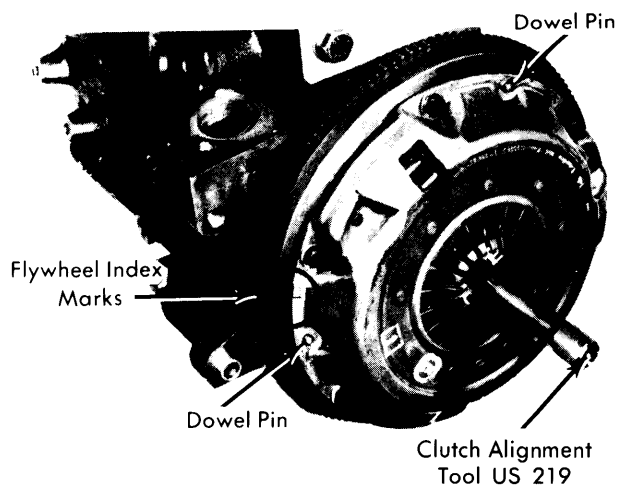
View Showing Clutch Assembly Alignment on Flywheel
